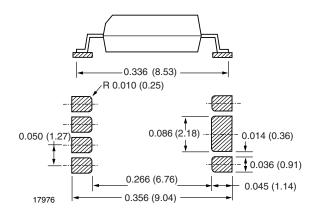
8 Pin PCMCIA, Heat Sink
